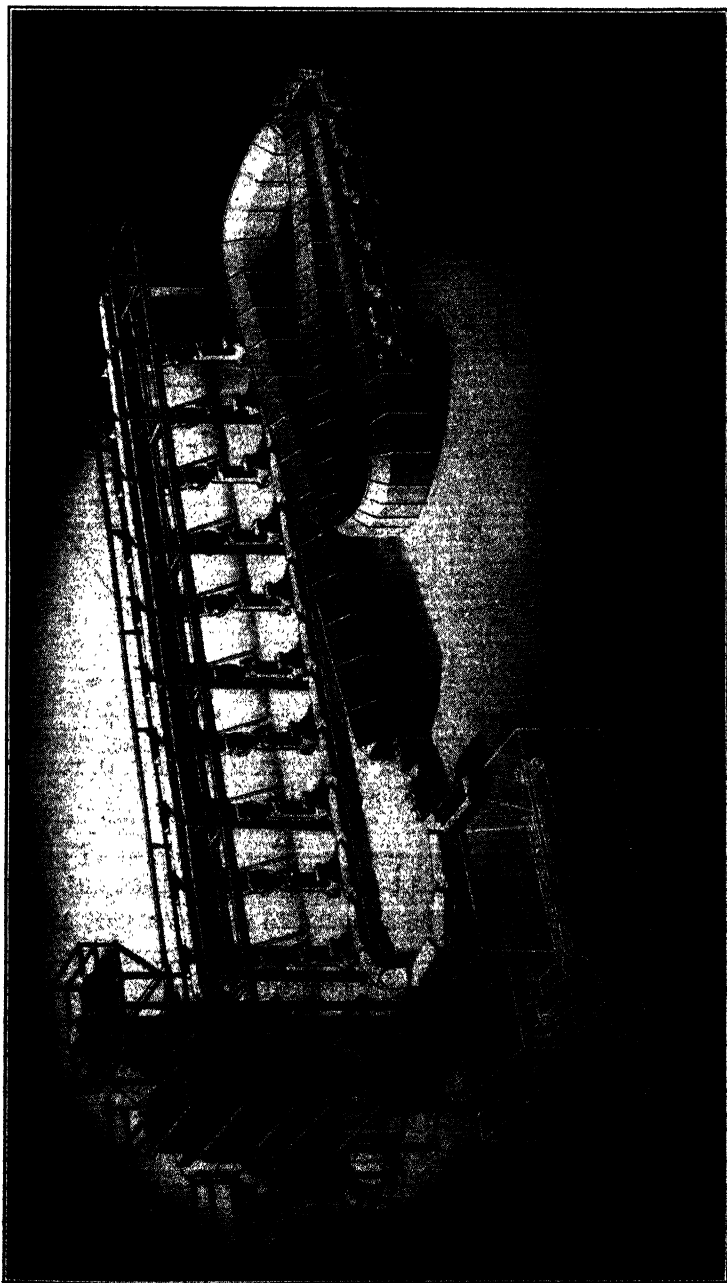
Mechanized mold production system using a continuous car-type mold conveyor. (Courtesy of National Engineering Co., Chicago, Ill.)
